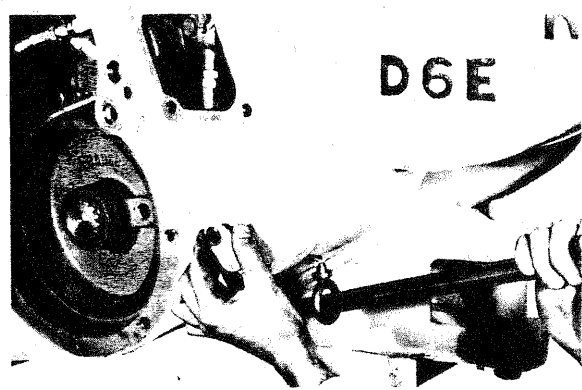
INSTALLATION OF HYDRAULIC BRAKE ASSEMBLY, POWER CONTROLLED WINCH (Sheet 1 of 2)
